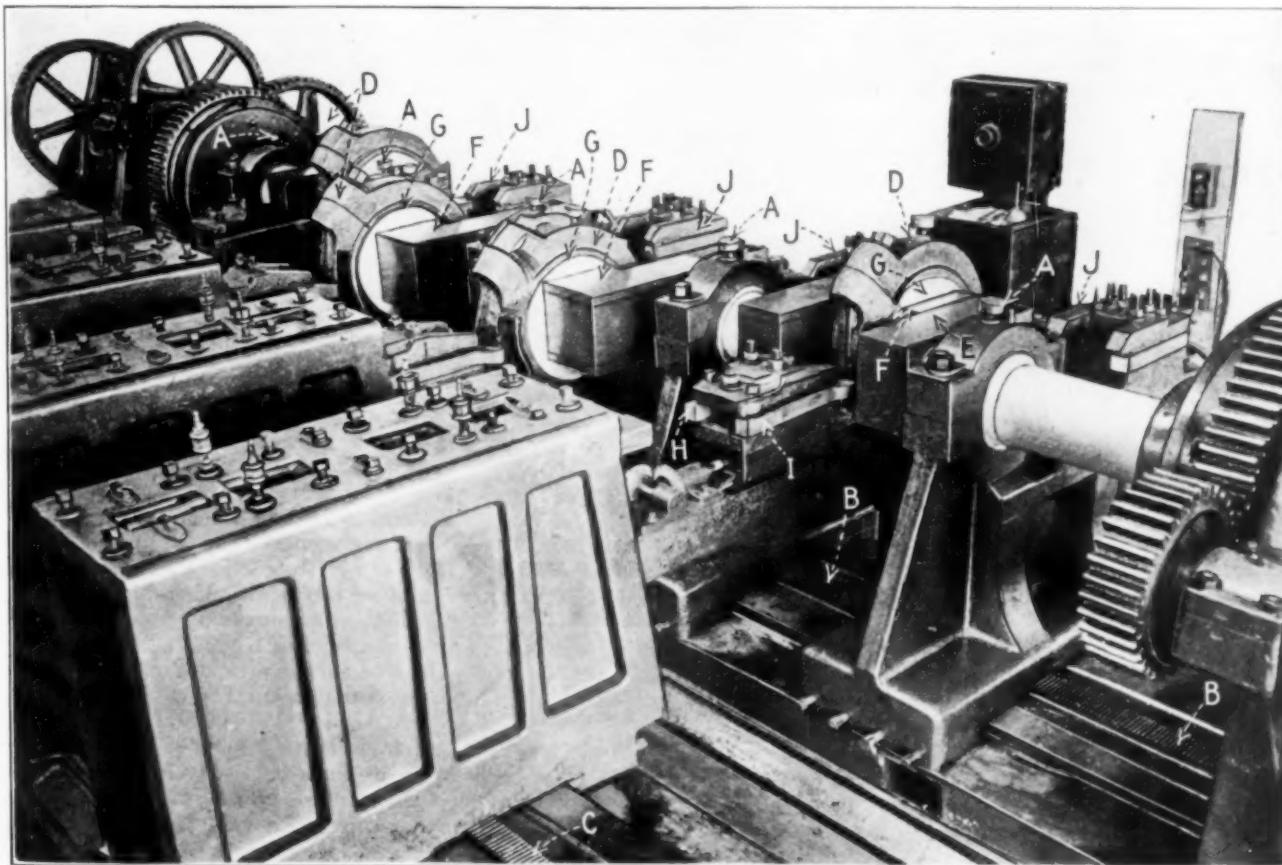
THE MACHINE WITH A LARGE CRANKSHAFT IN PLACE
